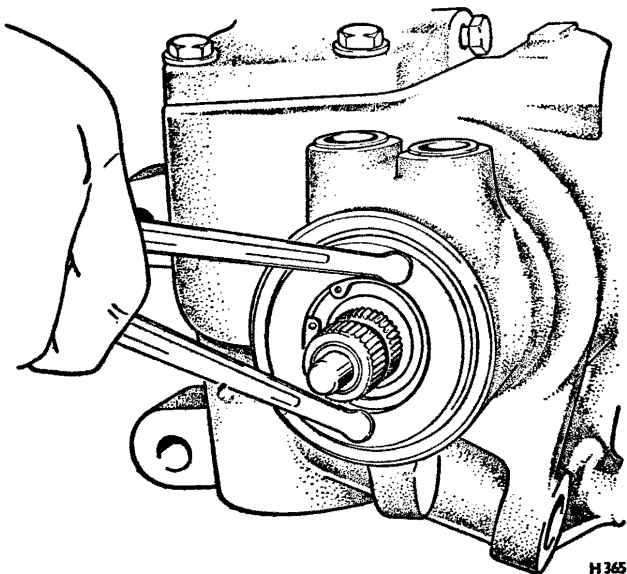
REMOVING ADJUSTER PLUG ASSEMBLY
